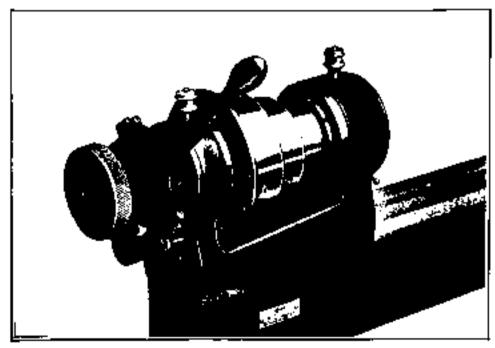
Ball Bearing Headstock with Lever Chuck Closer
